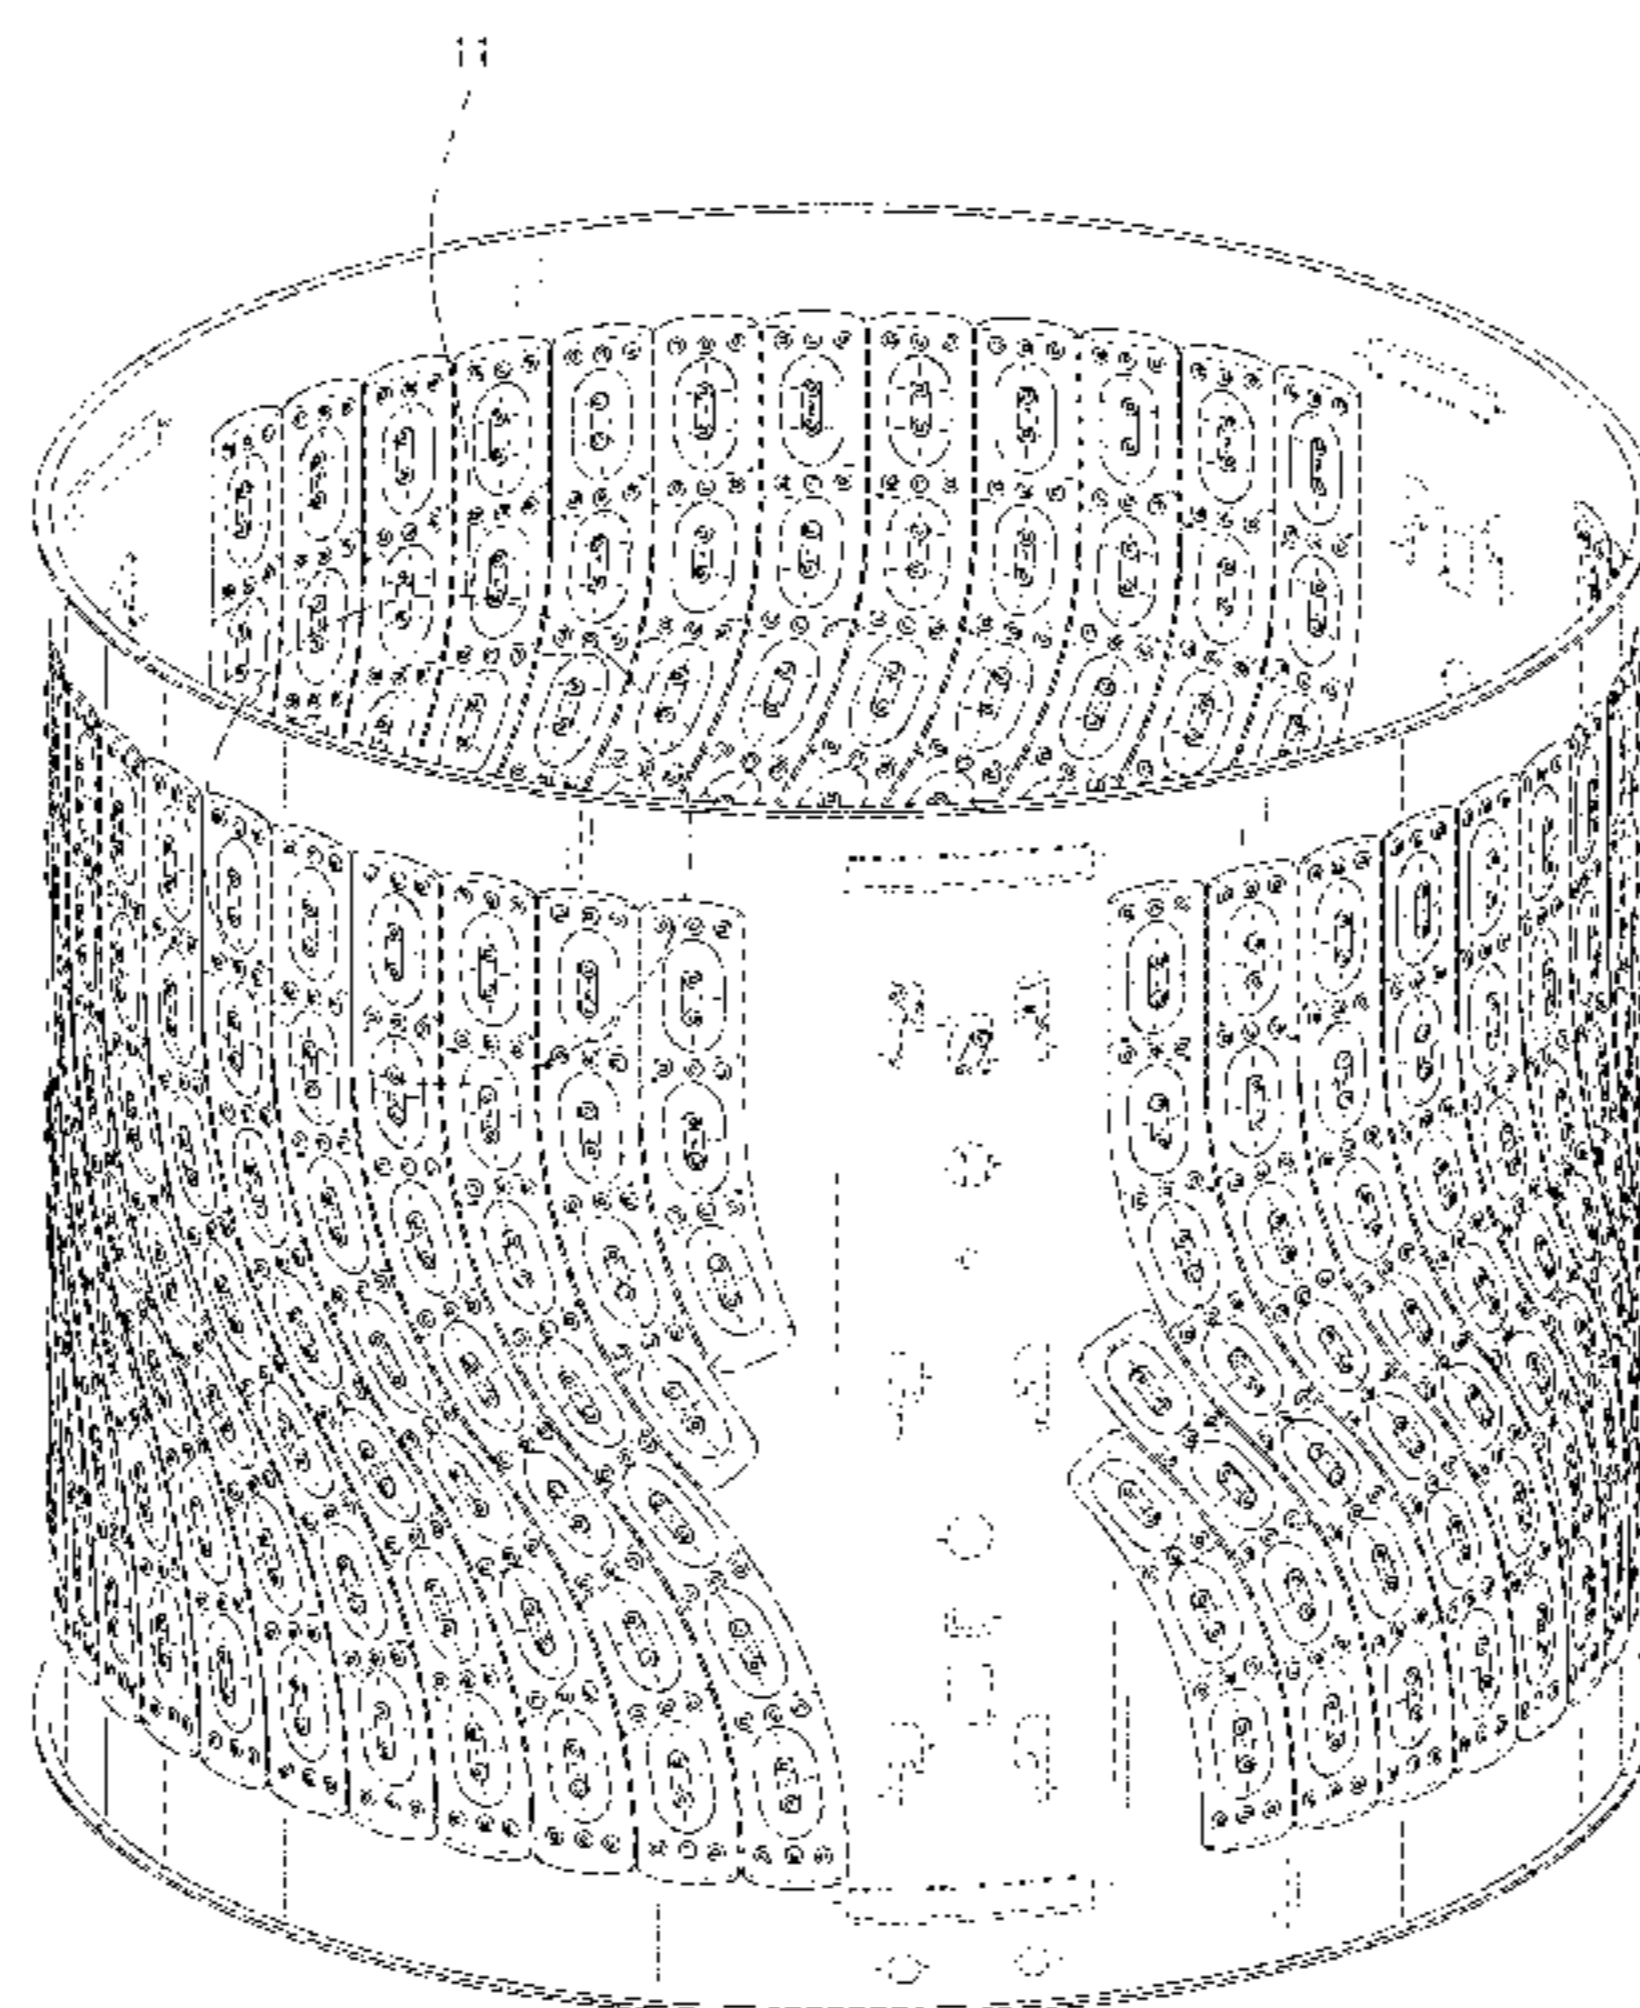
is a front perspective view of a drum for washing machine showing our new design; FIG. 2 is a front elevational view thereof; FIG. 3 is a rear elevational view thereof; FIG. 4 is a left-side elevational view thereof; FIG. 5 is a right-side elevational view thereof; FIG. 6 is a top plan view thereof; FIG. 7 is a bottom plan view thereof; FIG. 8 is a front flattened view of the encircled portion shown in FIG. 2 in which the pattern is repeated on the right and left sides of the drum for washing machine; FIG. 9 is a cross-sectional view taken through line 9-9 of FIG. 8; FIG. 10 is an enlarged view of the encircled portion in FIG. 9; FIG. 11 is an enlarged view of the encircled portion in FIG. 1; FIG. 12 is an enlarged view of the encircled portion in FIG. 2; and, FIG. 13 is an enlarged view of the encircled portion in FIG. 2.
